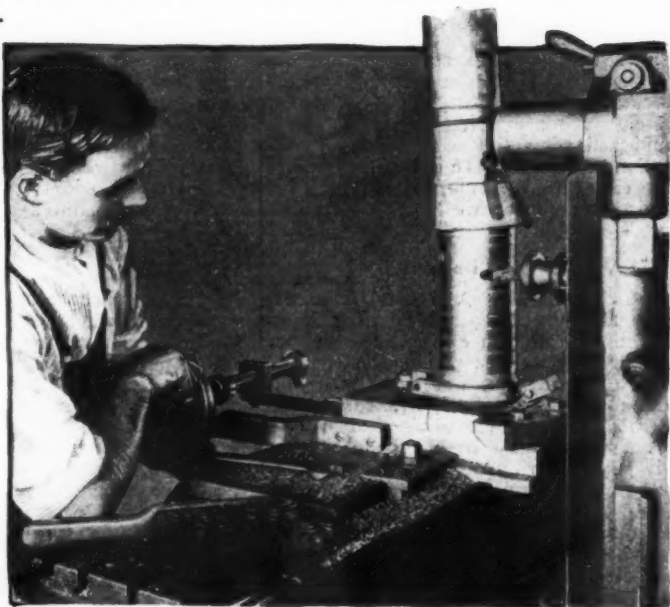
Cutting the valve ports in the Knight sleeve at the Stearns factory
